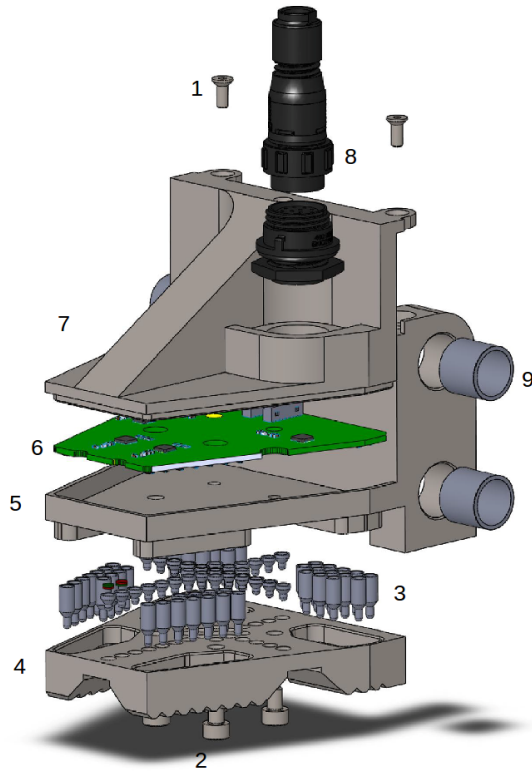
Exploded view of jaw structure. 1,2 bolts, 3 push rods, 4 gripping surface, 5 jaw case, 6 Hall sensor array PCB, 7 lid, 8 Buccaneer-400 plug and socket
